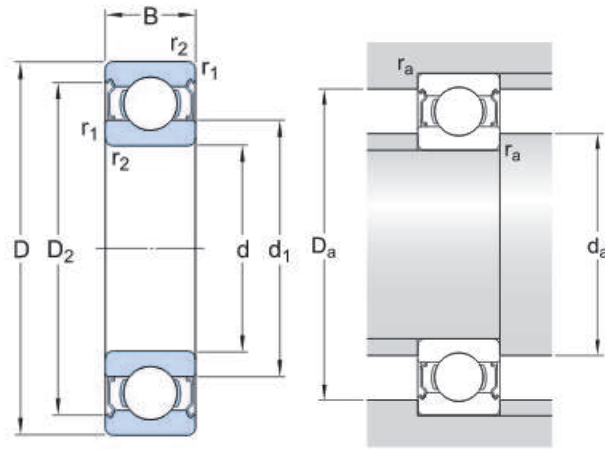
technical drawing of SKF 6001-2Z and SKF 625-2Z
